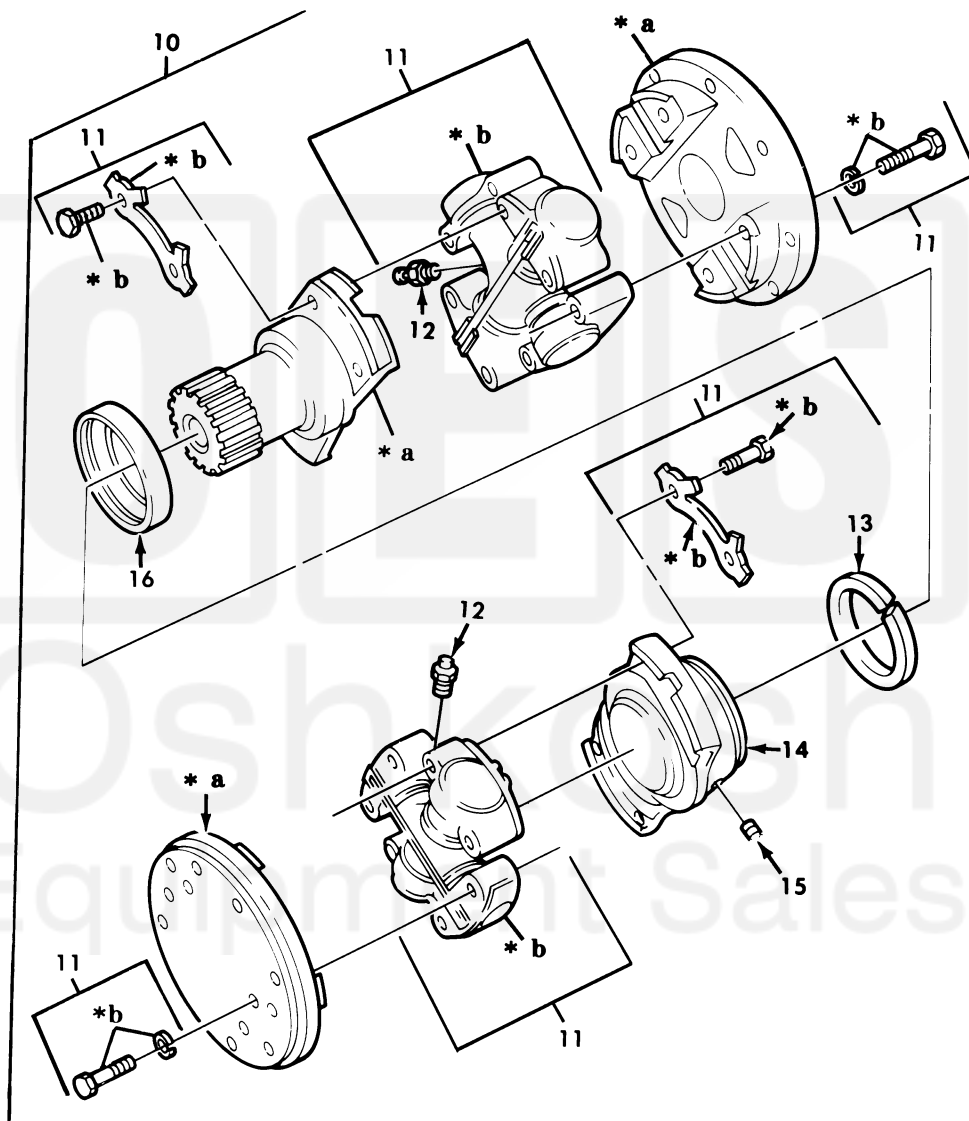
Propeller Shaft Assembly, Front Axle to Transfer Shaft, and Forward Rear Axle to Rear-Rear Axle (Mechanic's) (Sheet 2 of 2).
